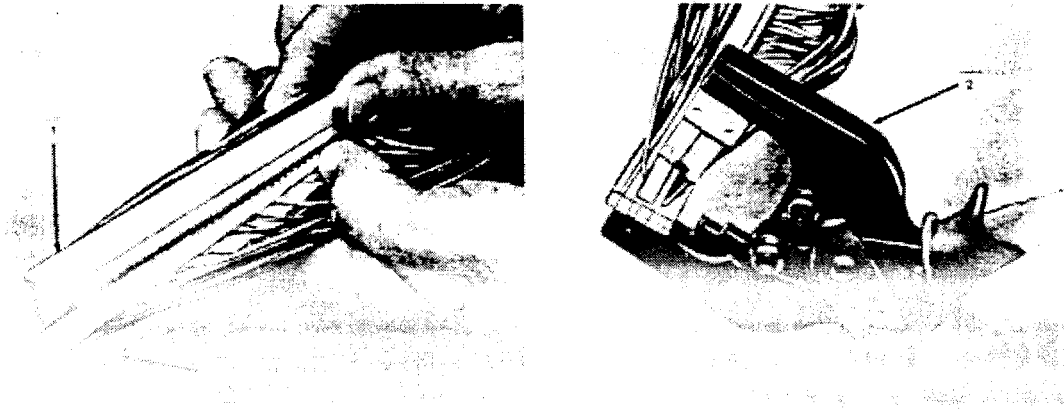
Inserting Bridge Module Into Through Cable Splice Connector
